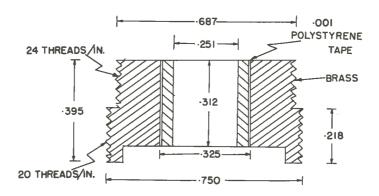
DETAIL OF R.F. BYPASS PLUG (All Dimensions In Inches)
